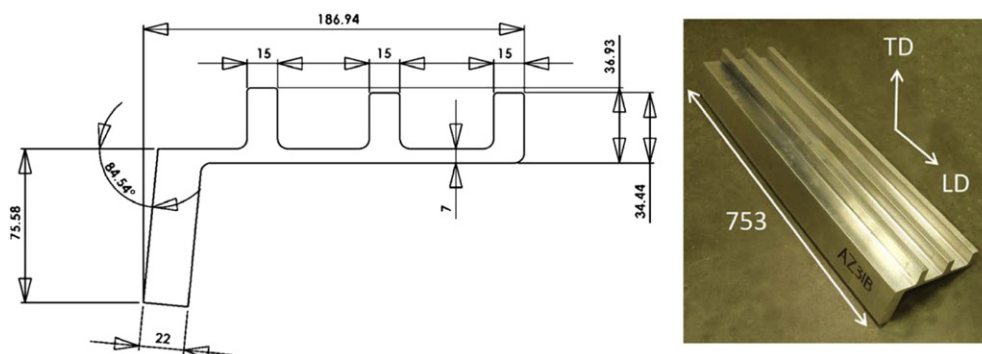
Dimensions of the AZ31B extrusion (all dimensions in mm) [22], corrosion and corrosion fatigue samples machined from 7 mm thick and 15 mm thick sections, respectively.
